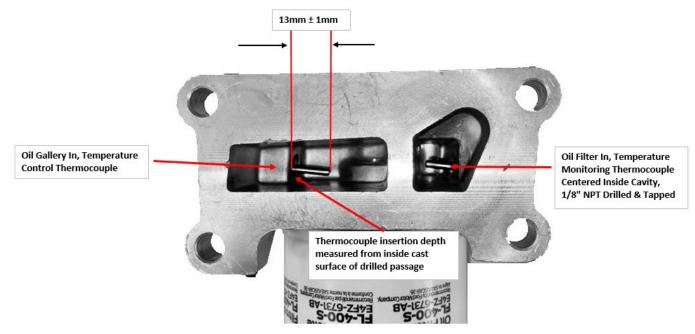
Oil Gallery In "Control Thermocouple" Oil Filter Adaptor Rear View
